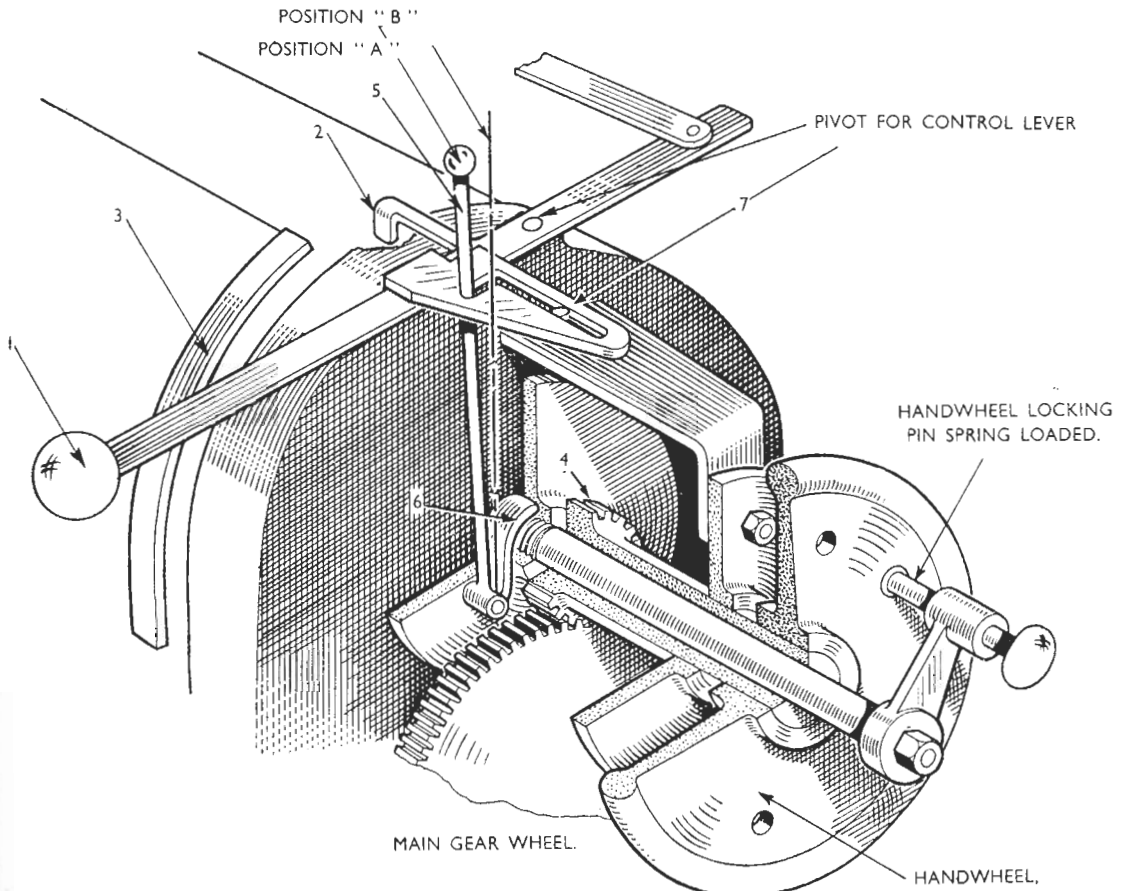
Diagrammatic arrangement of interlocking gears for Smith and Paget washing machine.
